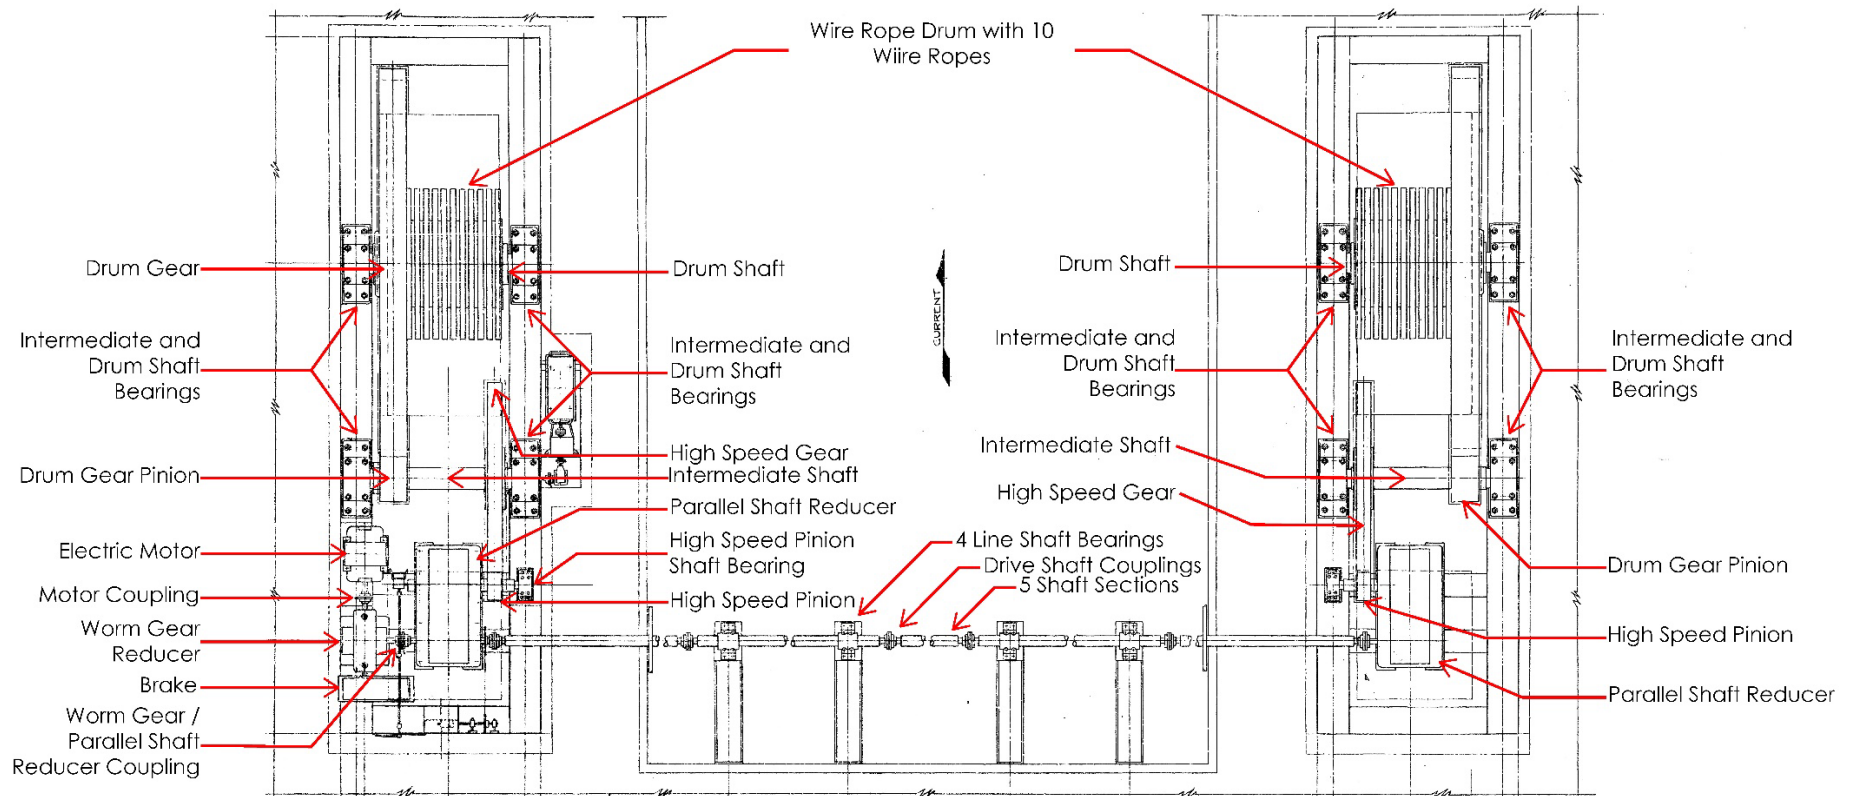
Drawing of Tainter Gate Operating Machinery with Labeled Relevant Components
